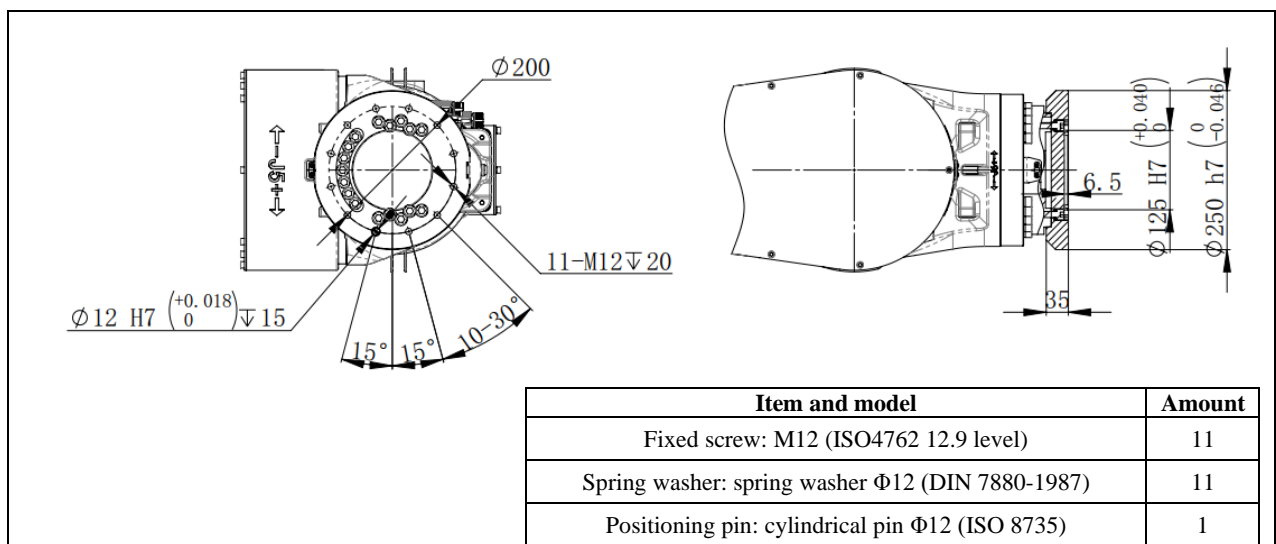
End flange mounting dimension (ER350-3300, ER500-2800, ER600-2800, ER700-2800)
